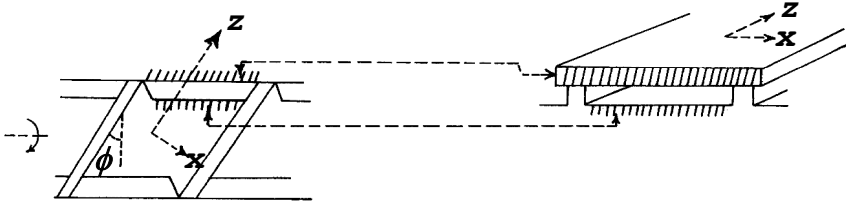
Illustrating the basis of the two-plate model used to analyse flow in injection-moulding machines and screw extruders. ϕ is the flight angle of the screw and flow occurs along the z direction. Ref. [21,22]
